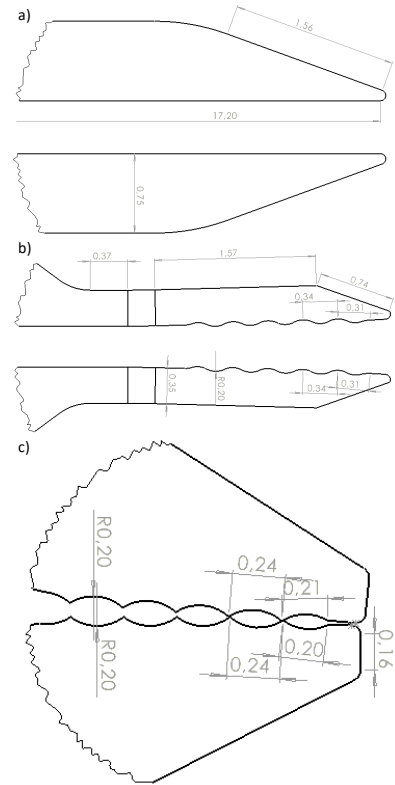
Drawing (unit millimetre) of a) Flat surface finger gripper b) Wave Gripper (WG-stainless steel) c) Crocodile Gripper (CG-SU8 polymer)
